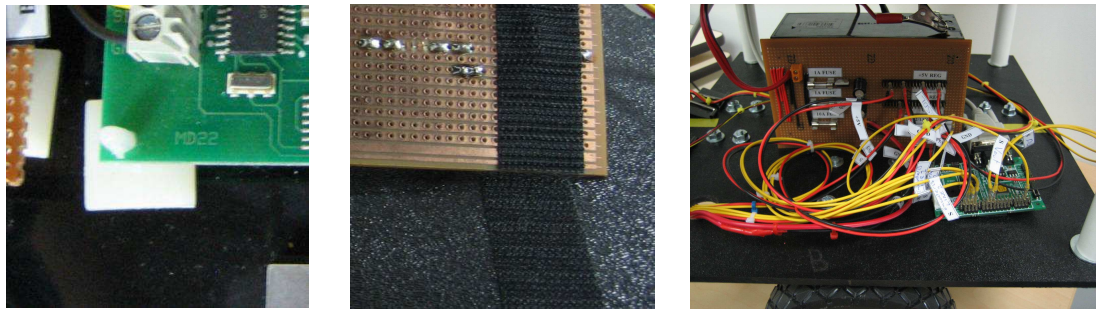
Flexible Robot Platform Sensor Mounting
